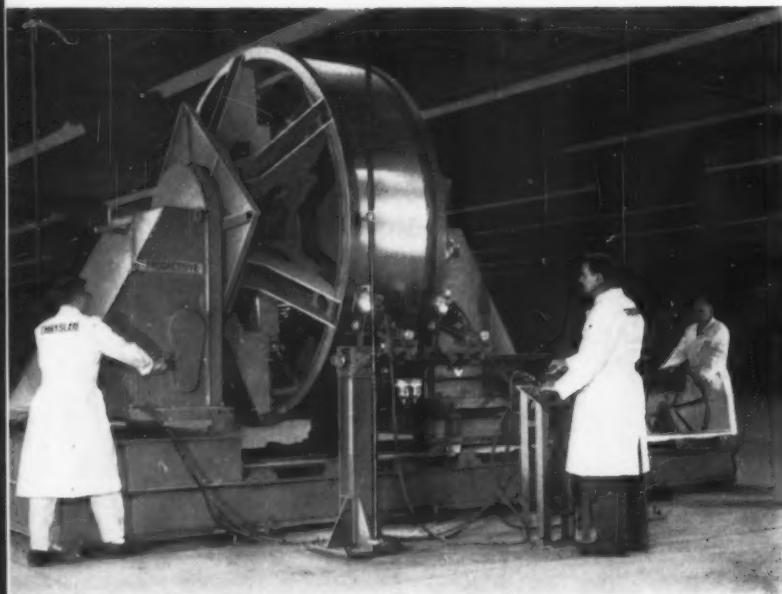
About 1/2 inch of stock is removed from each end of the barrel in this routing operation. The high-speed steel, single-flute routing tools are rotated at 22,000 rpm.
